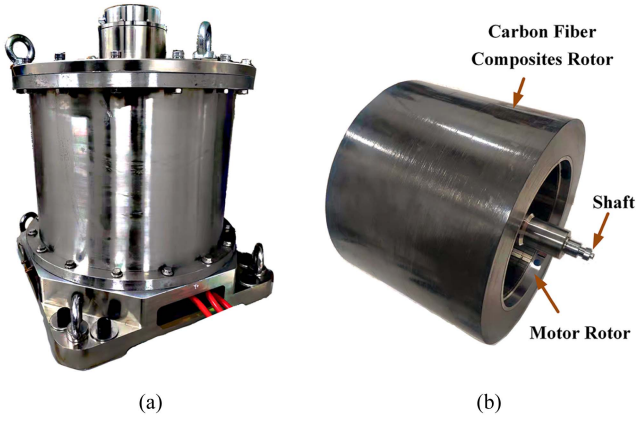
(a) FESS prototype. (b) Carbon fiber composites flywheel rotor of the FESS prototype.
